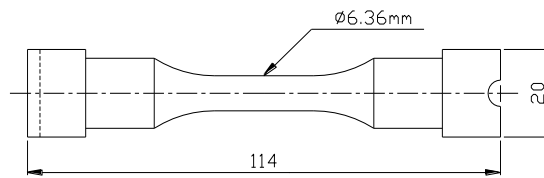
Geometry and dimensions of the specimen 2 (Strain controlled tests).
